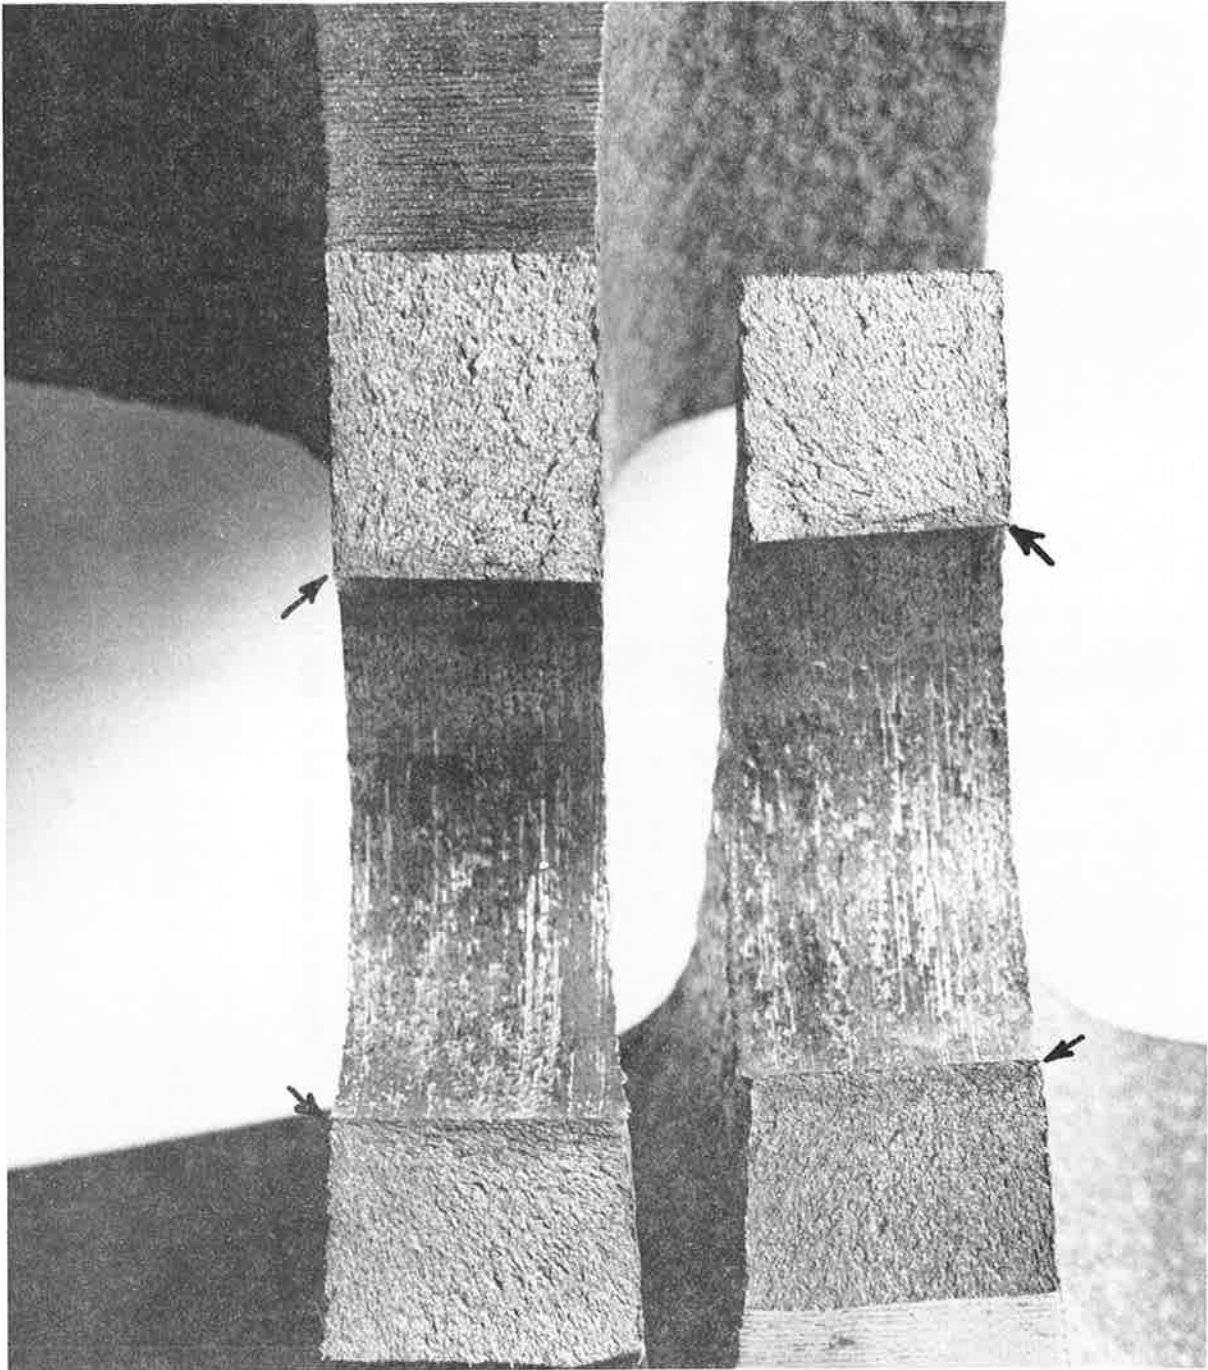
Specimen 5A-7: View of Fracture Surface. Point of Fracture Initiation Indicated by Arrows
